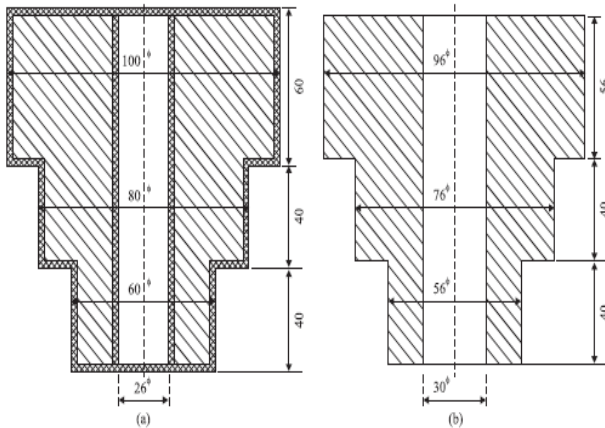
(a) Component as cast, (b) Finished component (All dimensions are in mm).
